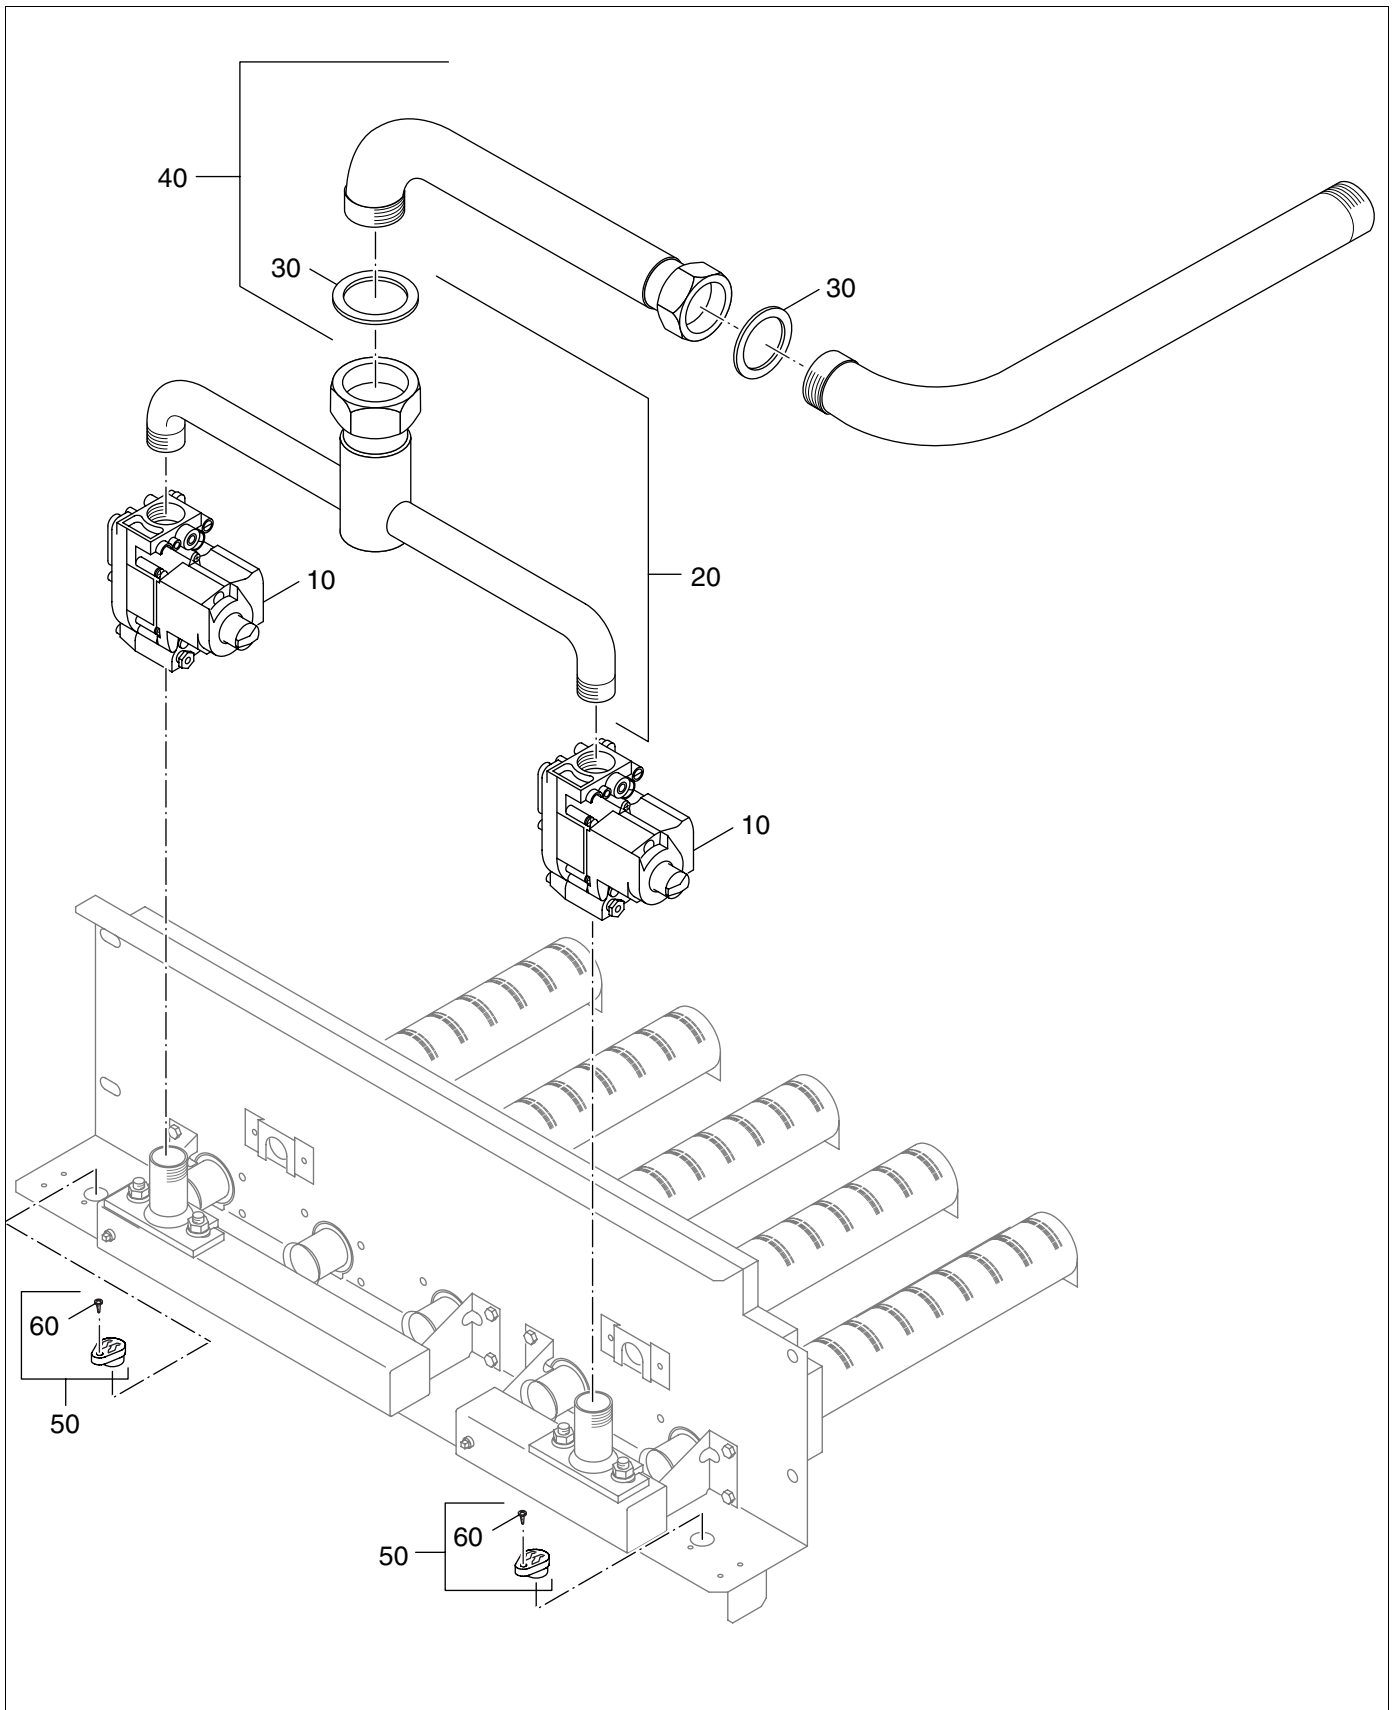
Gas valve VR8304H4206 G334 X FAS US/CA
